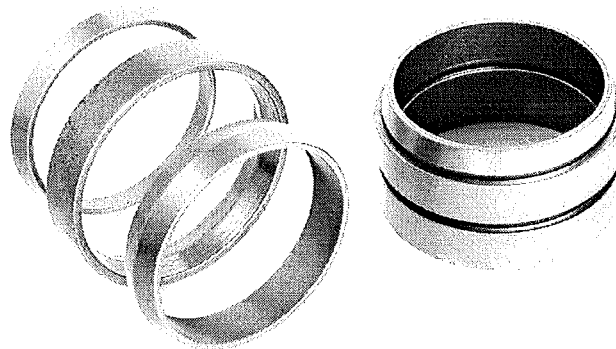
Ring spring components (inner, outer and half inner elements)
